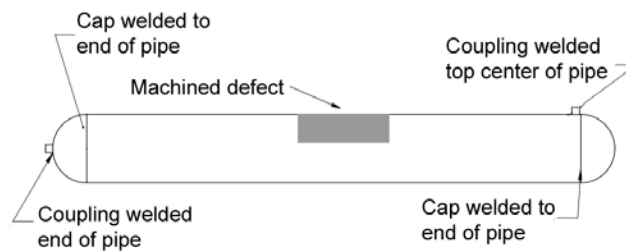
Schematic of each pipe specimen including weld locations
